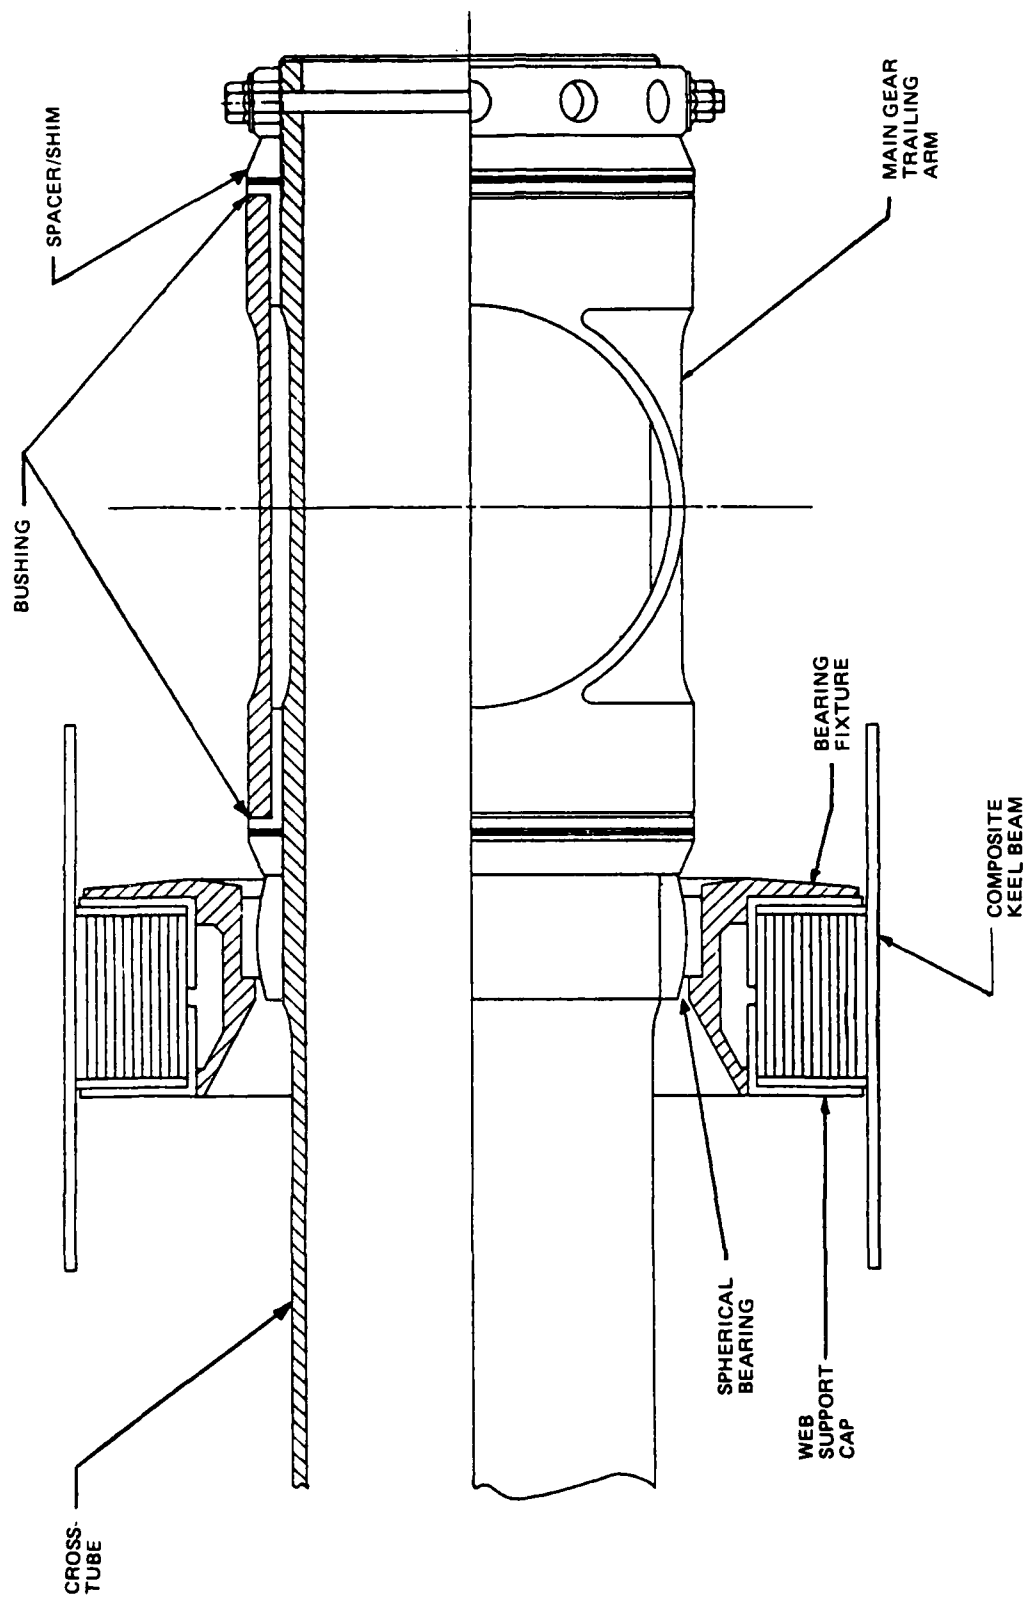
Steel cross tube/trailing arm assembly of crashworthy uncoupled landing gear.
